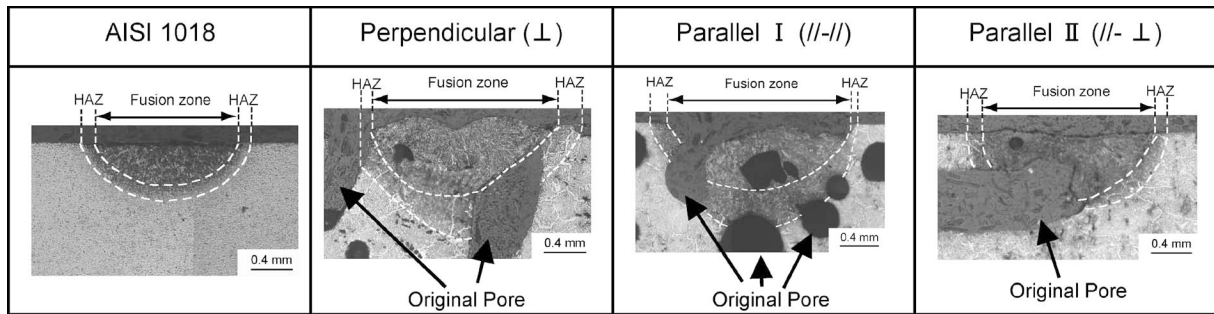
Cross section of the laser weld beads of the nonporous iron (AISI 1018) and lotus-type porous iron; pore directions perpendicular ( $\perp$ ), parallel I ( $//-//$ ), and parallel II ( $//-\perp$ ) to the specimen surface at a laser power of 1.0 kW and welding speed of 1 m/min.
